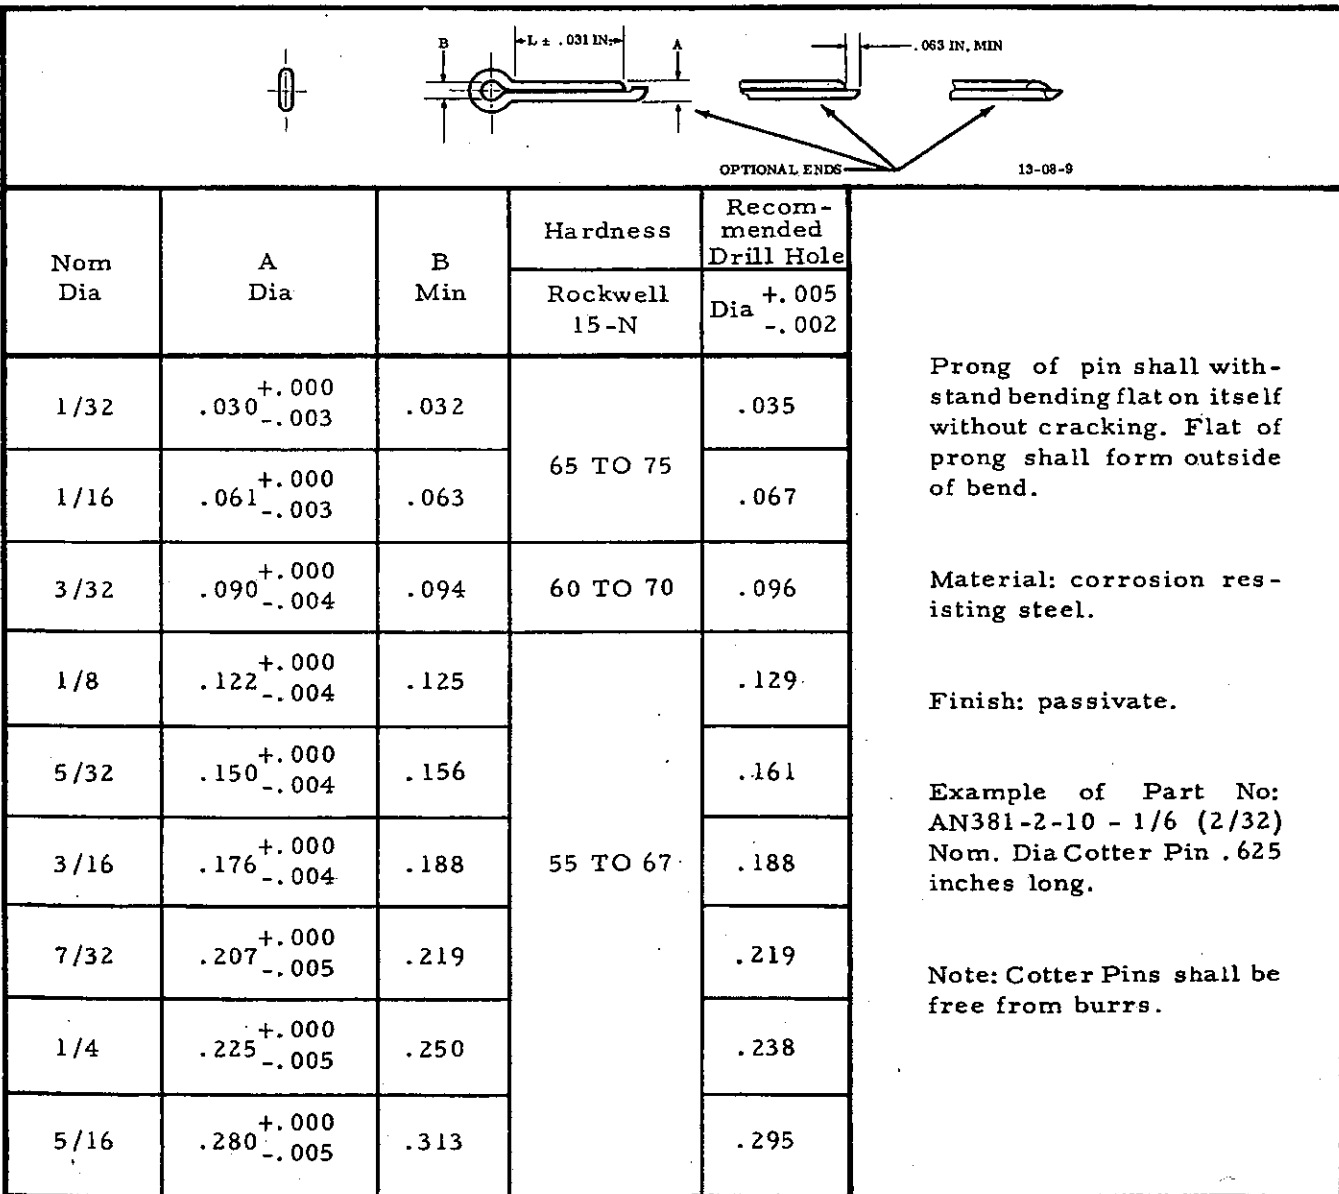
(Sheet 1 of 4) Cotter-pins - AN381
